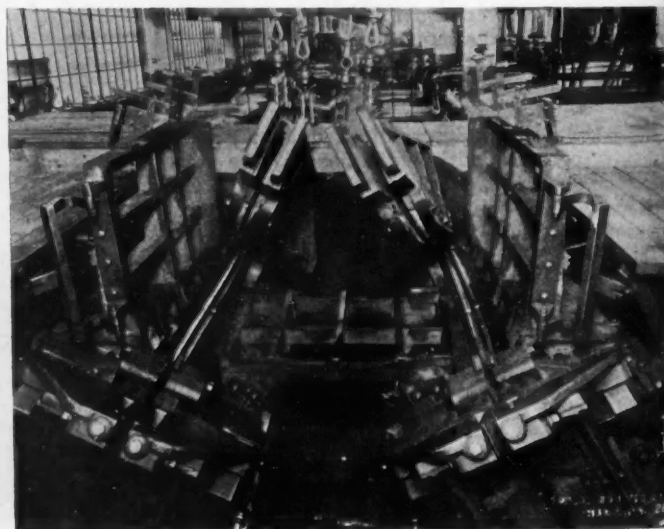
A LARGE DOUBLE WELDING-MACHINE
